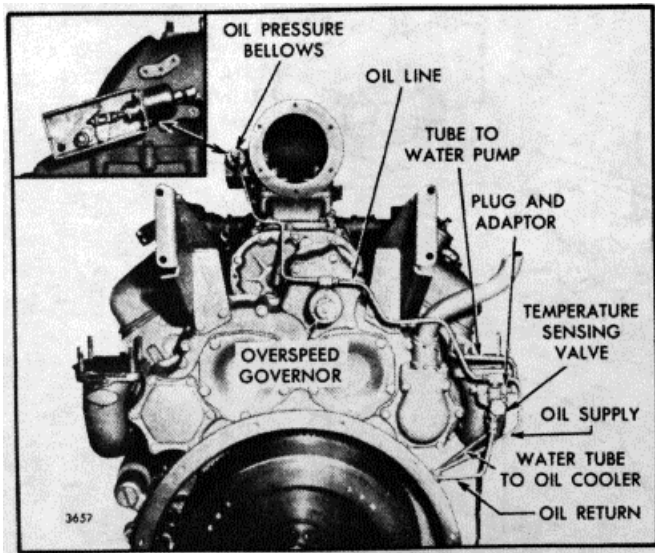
Automatic Mechanical Shutdown System Mounting
